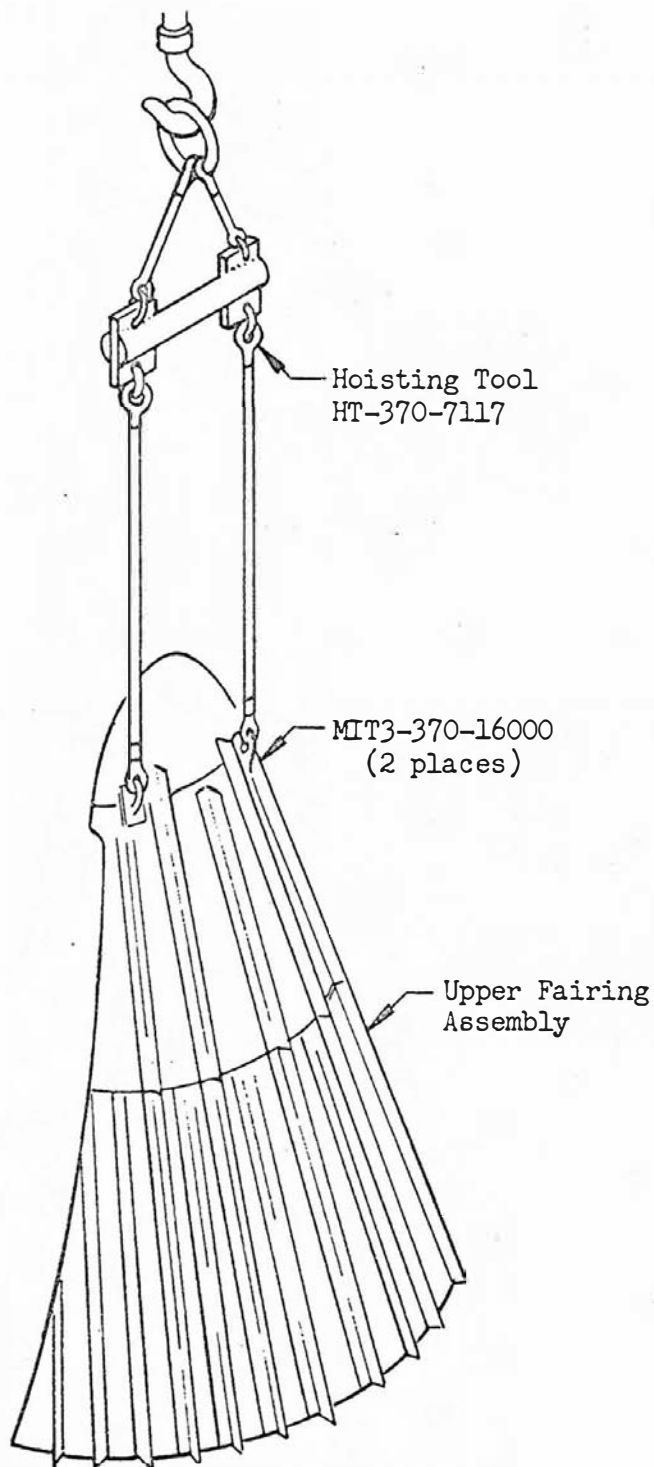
18. Hoisting Tool for Upper Fairing Assembly
